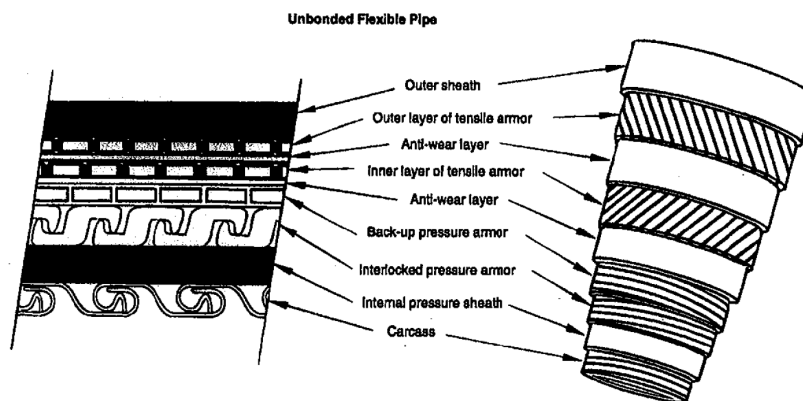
Schematic of Typical Flexible Riser Cross-sections
